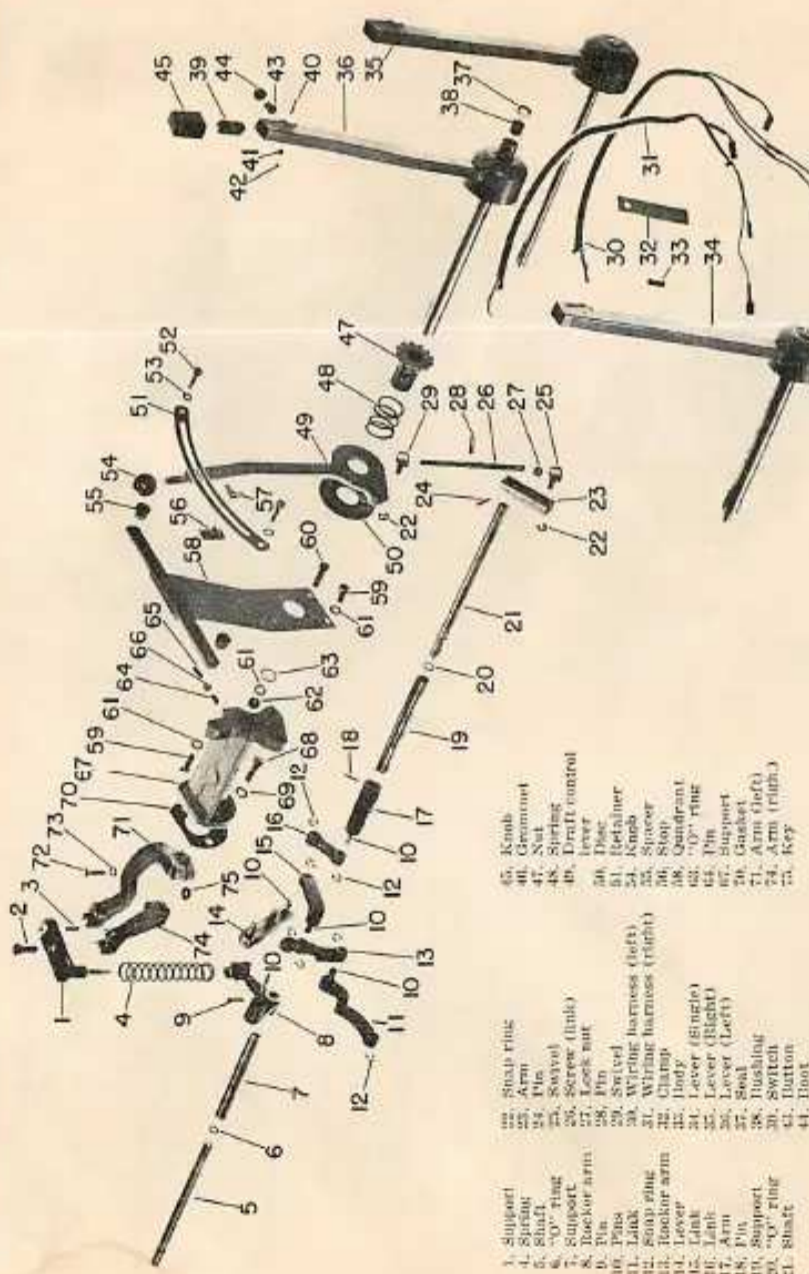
Exploded view of hydraulic control linkage used on models equipped with draft control (3-point hitch) and two Hydra-Lectric control valves for remote cylinders. A dash pin (37) is attached to arm (8). Arms (71 and 74) are connected to the Hydra-Lectric control valves and lever (14) is connected to the servo valve pilot spool.
